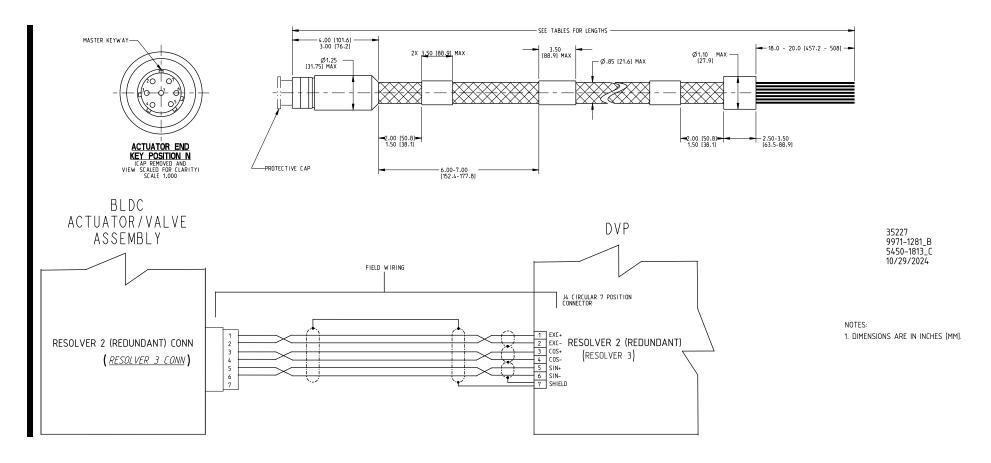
Cable, 7-Pin Actuator Motor Resolver #2 (Redundant)
